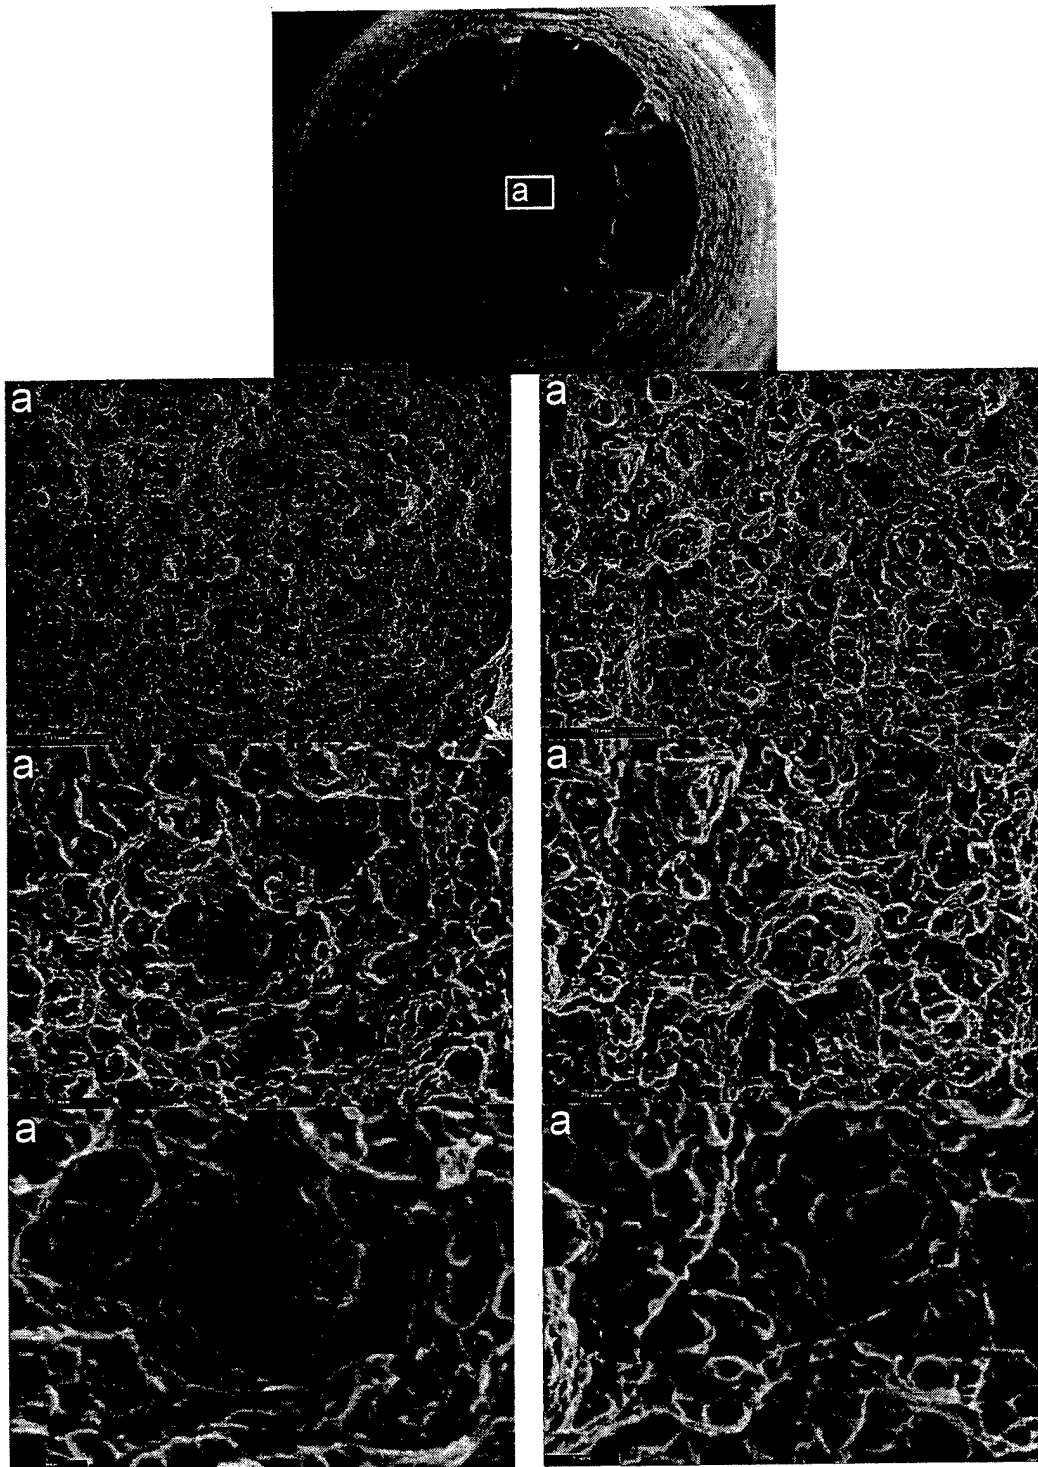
Fracture surface of Ti-15-3 in RR condition #7 (table 9, aging at 538°C, 16h).
